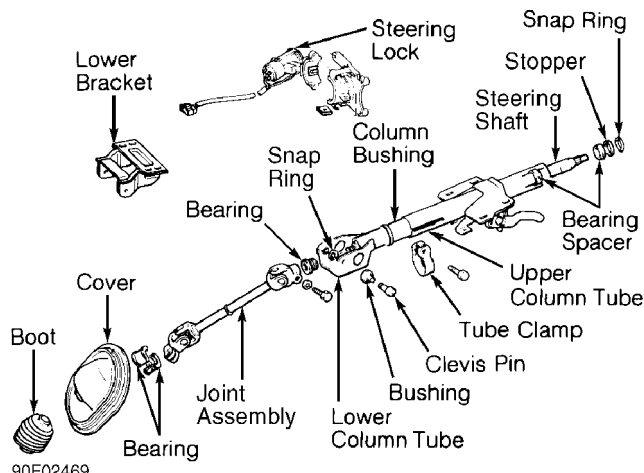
Exploded View of Steering Column Assembly (Eclipse & Galant)
